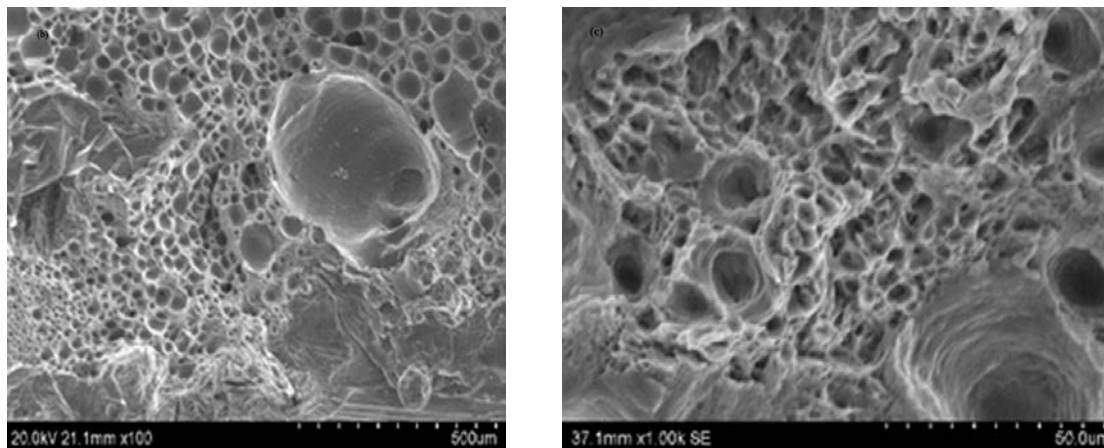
Fractured surface of (a) single and (b) double pass welds.
